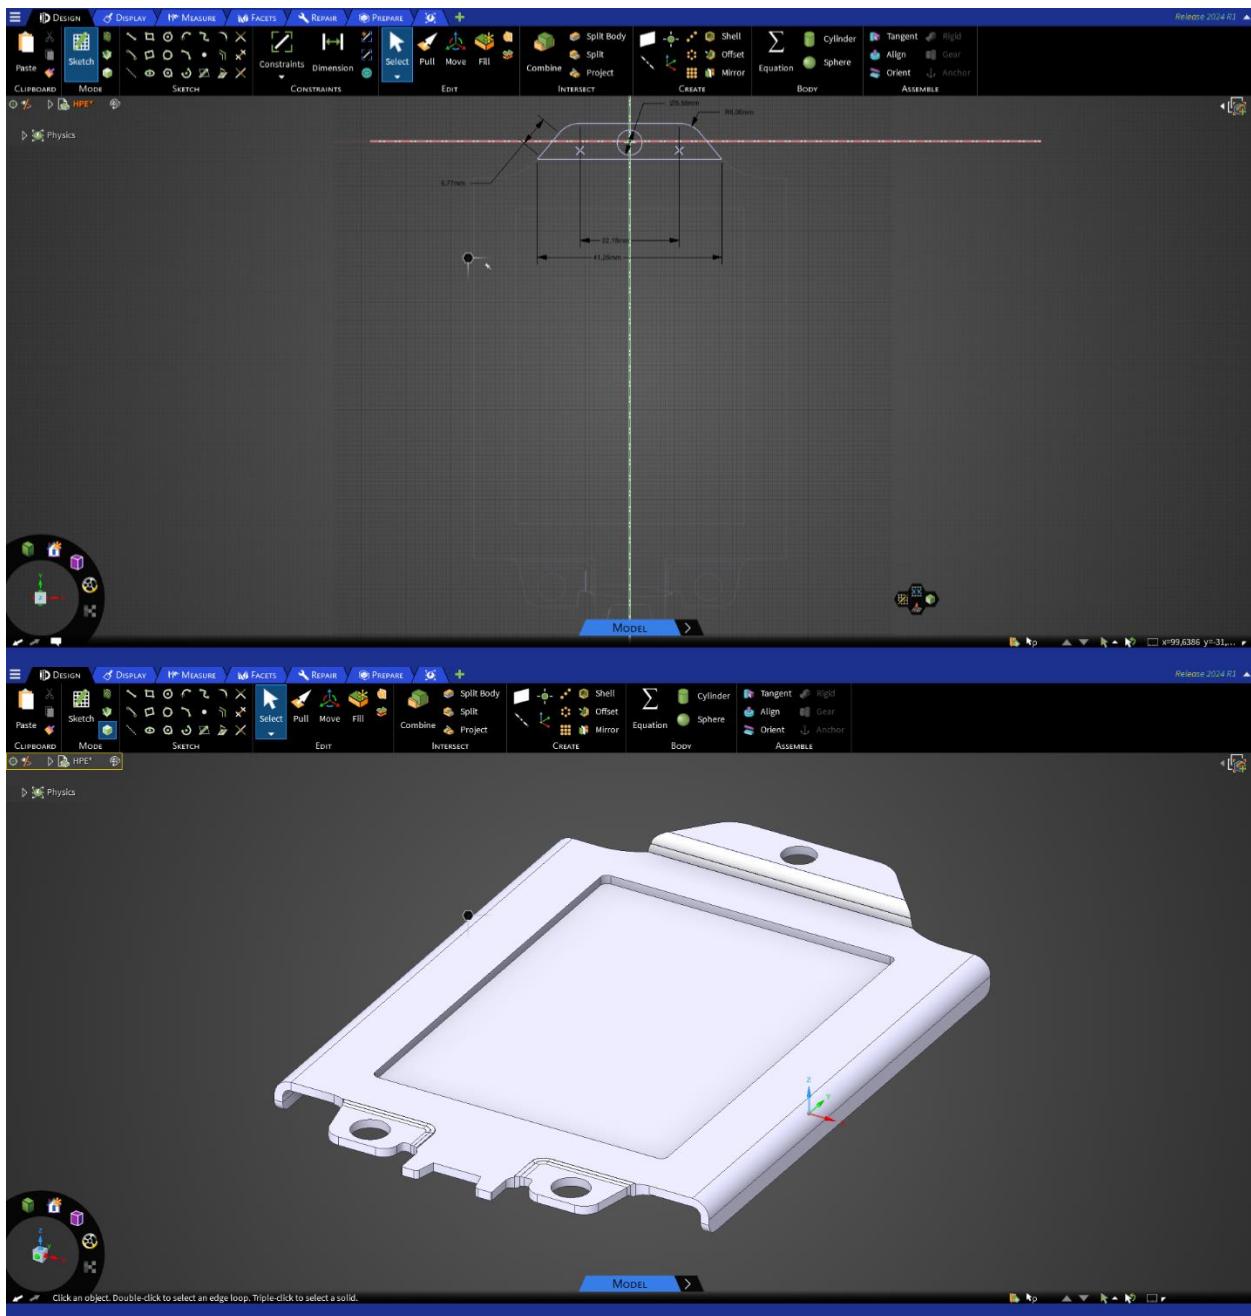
SP3 Socket Force Frame - Geometric Design and Manufacturing Considerations
